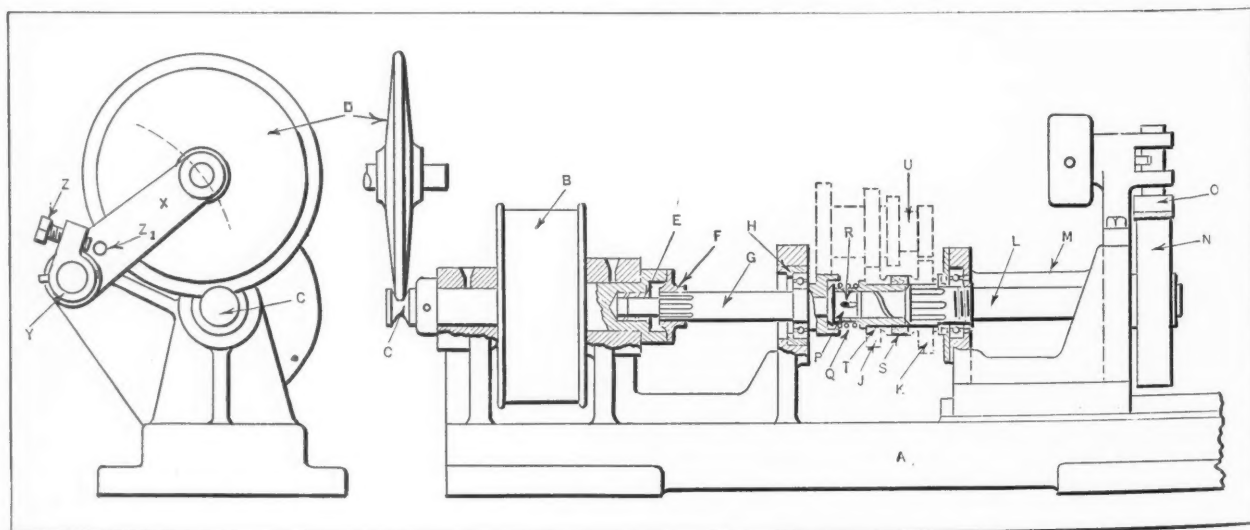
Lapping Machine Designed to Vary the Center Distance, Move the Gears Endwise, and Provide a Dwell with the Gears Bottomed During the Lapping Operation
